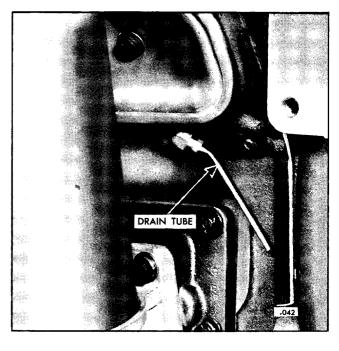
Air Box Drain Tube Mounting (6V Engine)
